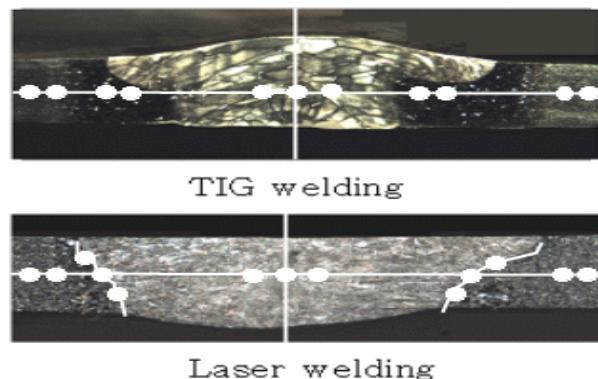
Cross section view of test specimens with TIG and laser welding.
